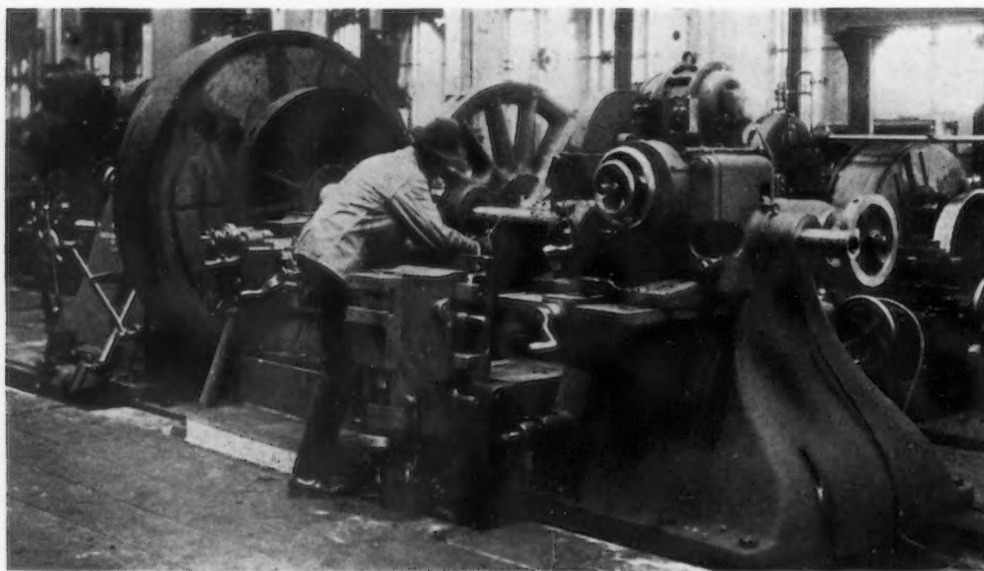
Boring crankpin hole with quartering attachment on journal turning lathe.
